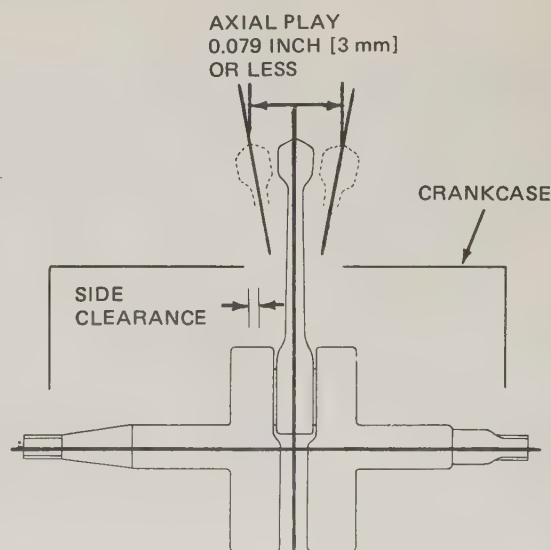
Checking the condition of the big-end bearing by measuring the axial play in the connecting rod. (Outboard Marine Corporation)
